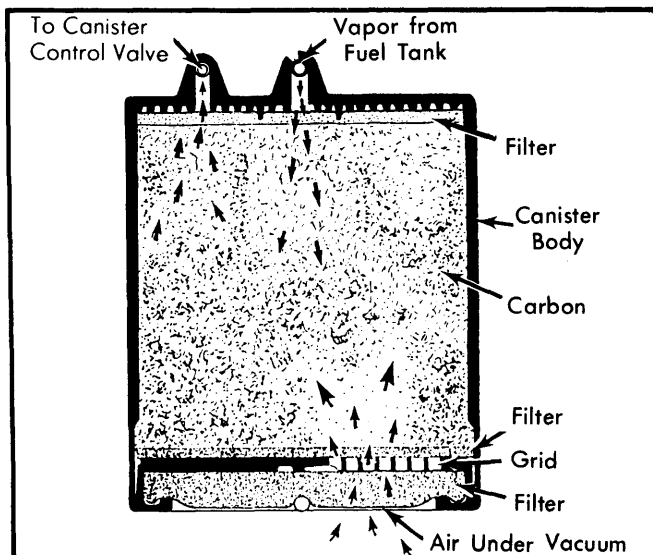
Cutaway View of 2-Tube Vapor Canister (3.0L Engine)
